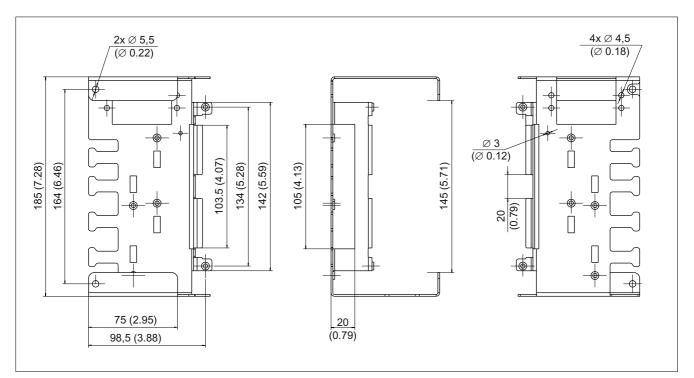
Dimension drawing of Screening Kit, frame size FSC, all data in mm and (inches)
